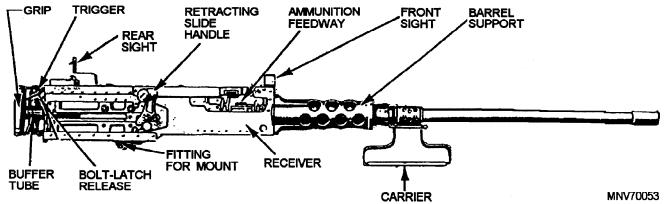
50-cal. HB Browning machine gun (M2).
